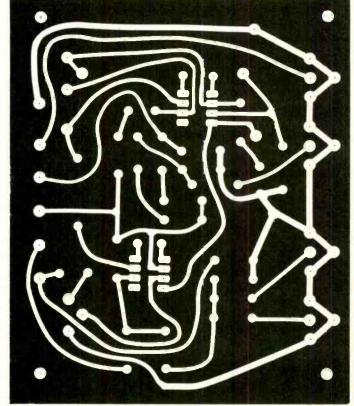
Actual-size foil pattern for a pc board is at right; component layout above.
